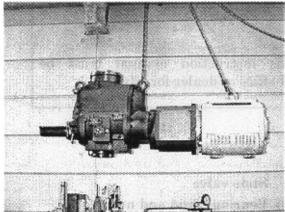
Lifting the Compressor, Motor Spacer and Motor
